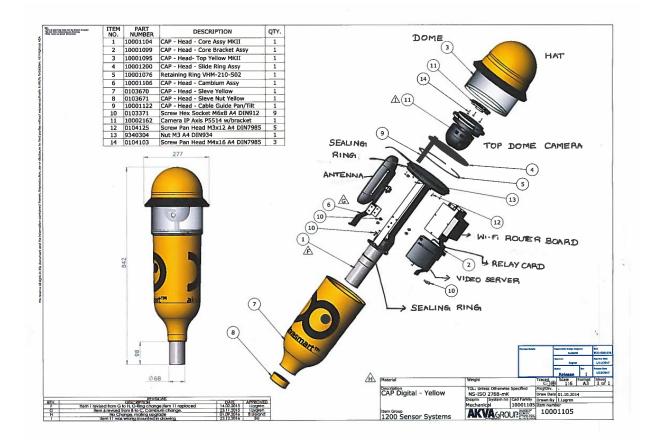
CAP Assembly (parts breakdown)¹⁴
